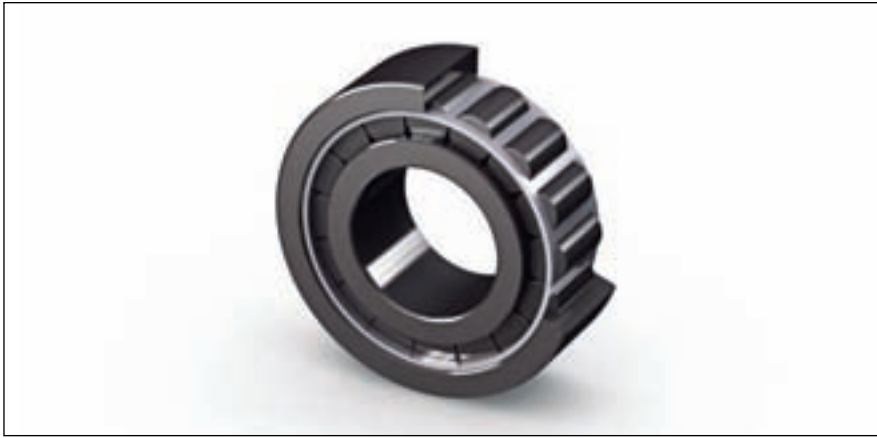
An SKF high-capacity roller bearing with the JA-style outer-ring shoulder-guided cage.
